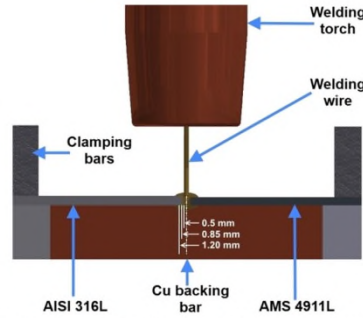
Welding wire positioning during the welding-brazing experiments
